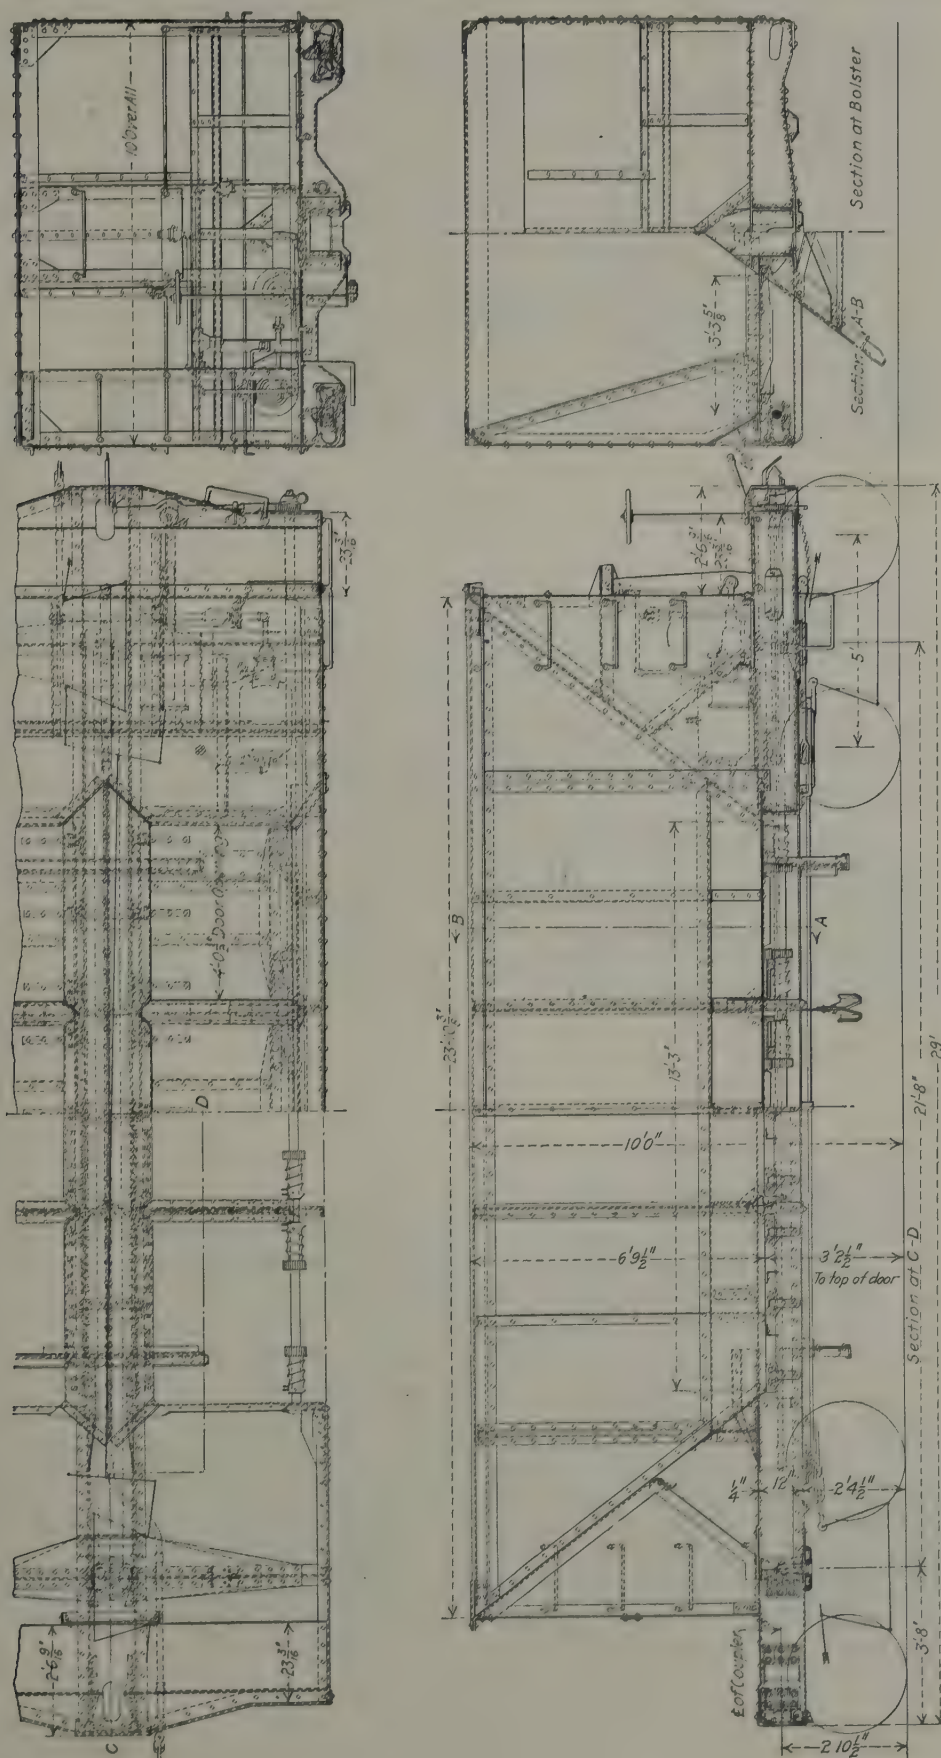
Bingham & Garfield All-Steel 60-Ton Capacity Hopper Ore Car Shown in Fig. 88. Builder, Pressed Steel Car Company.
